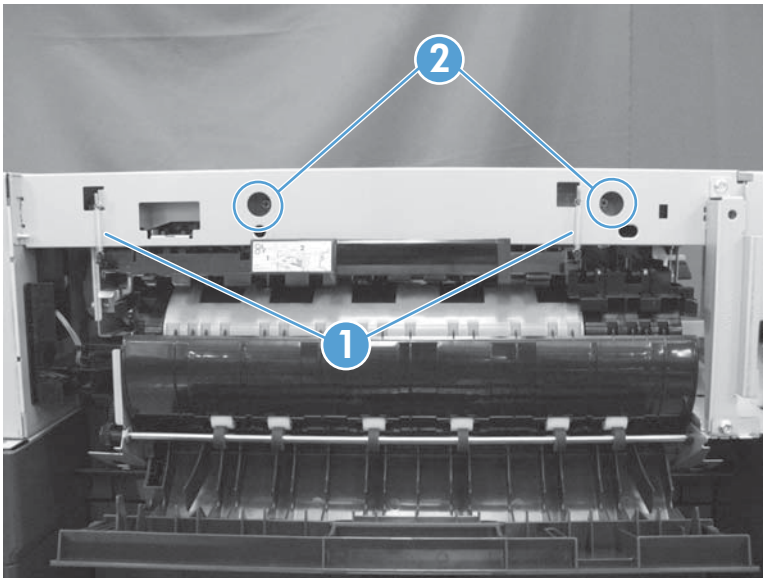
Remove the stapler/stacker alignment assembly (2 of 7)
